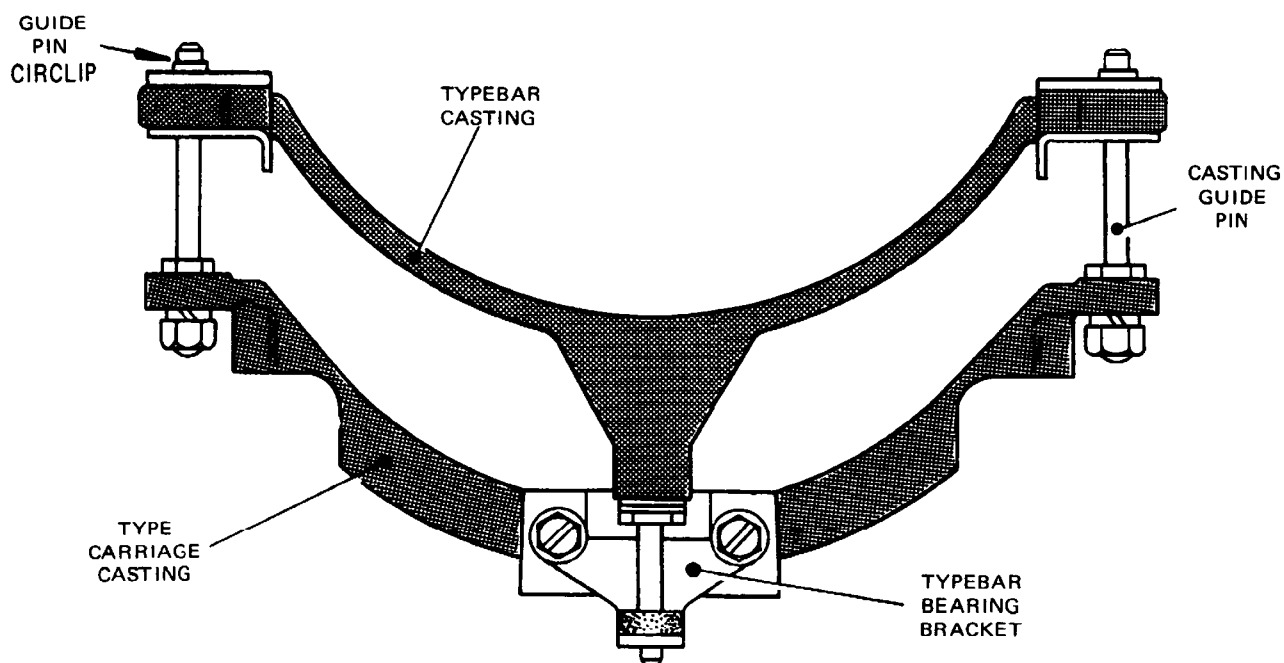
TYPEBAR MECHANISM (REAR VIEW)
